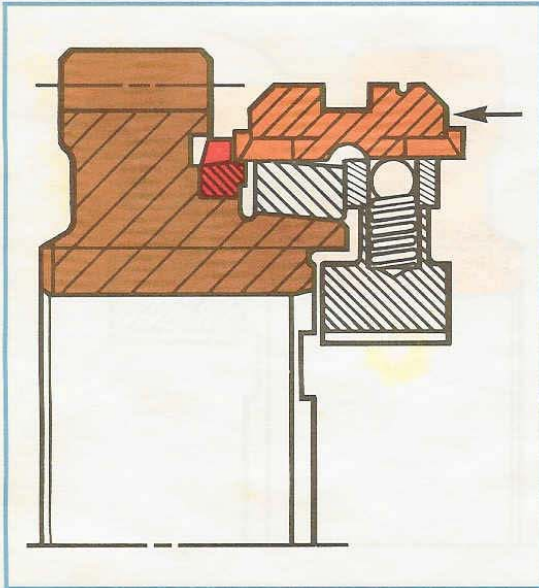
, Sleeve and Clutch Tooth Chamfers in Contact.
